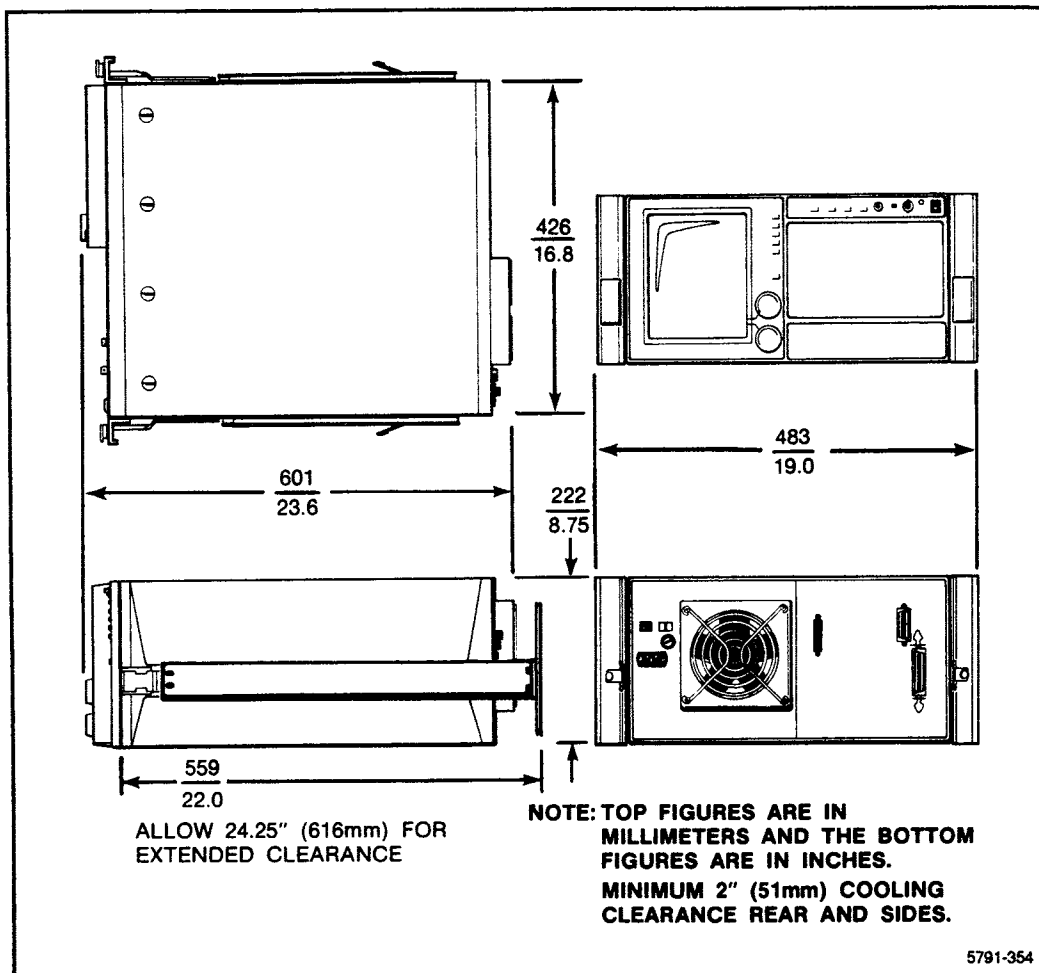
Rackmount 11401/11402 dimensional drawing.
